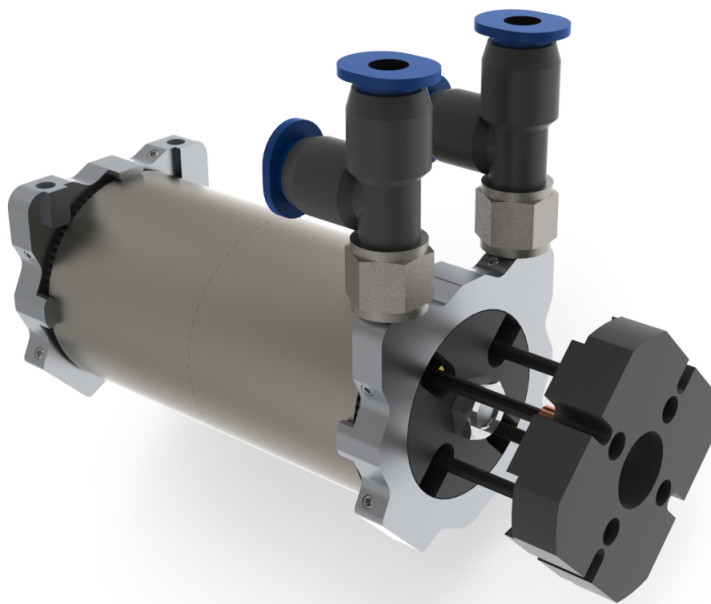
A rendering of the complete, as built motor shows the front endcap, motor output coupler, and overall layout of the motor.
